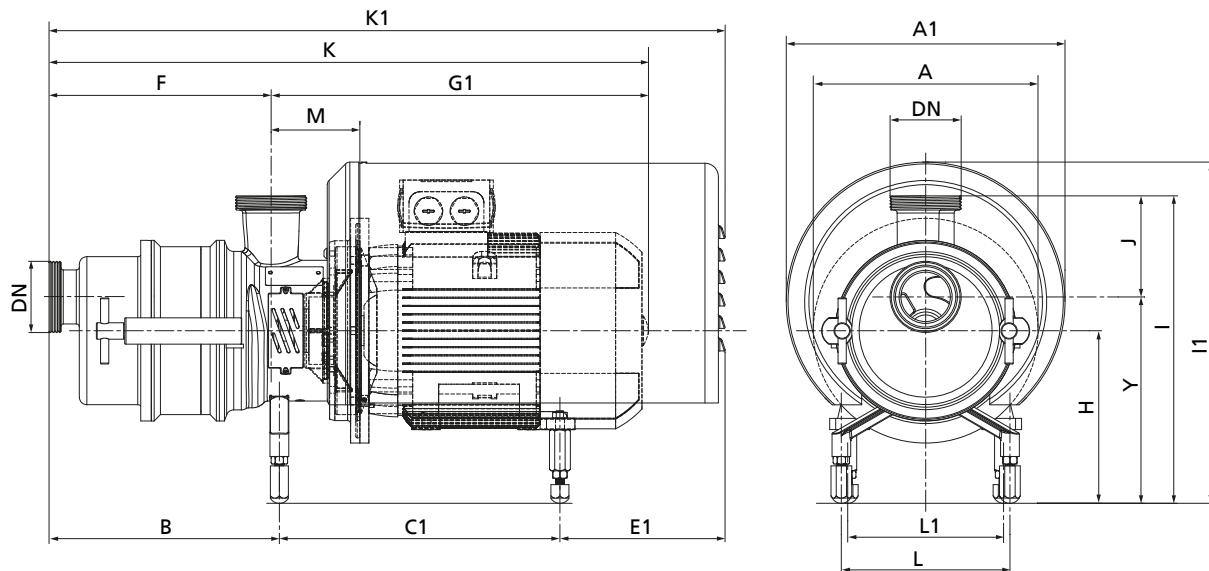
Pump set with motor shroud, on 4-point ball feet
